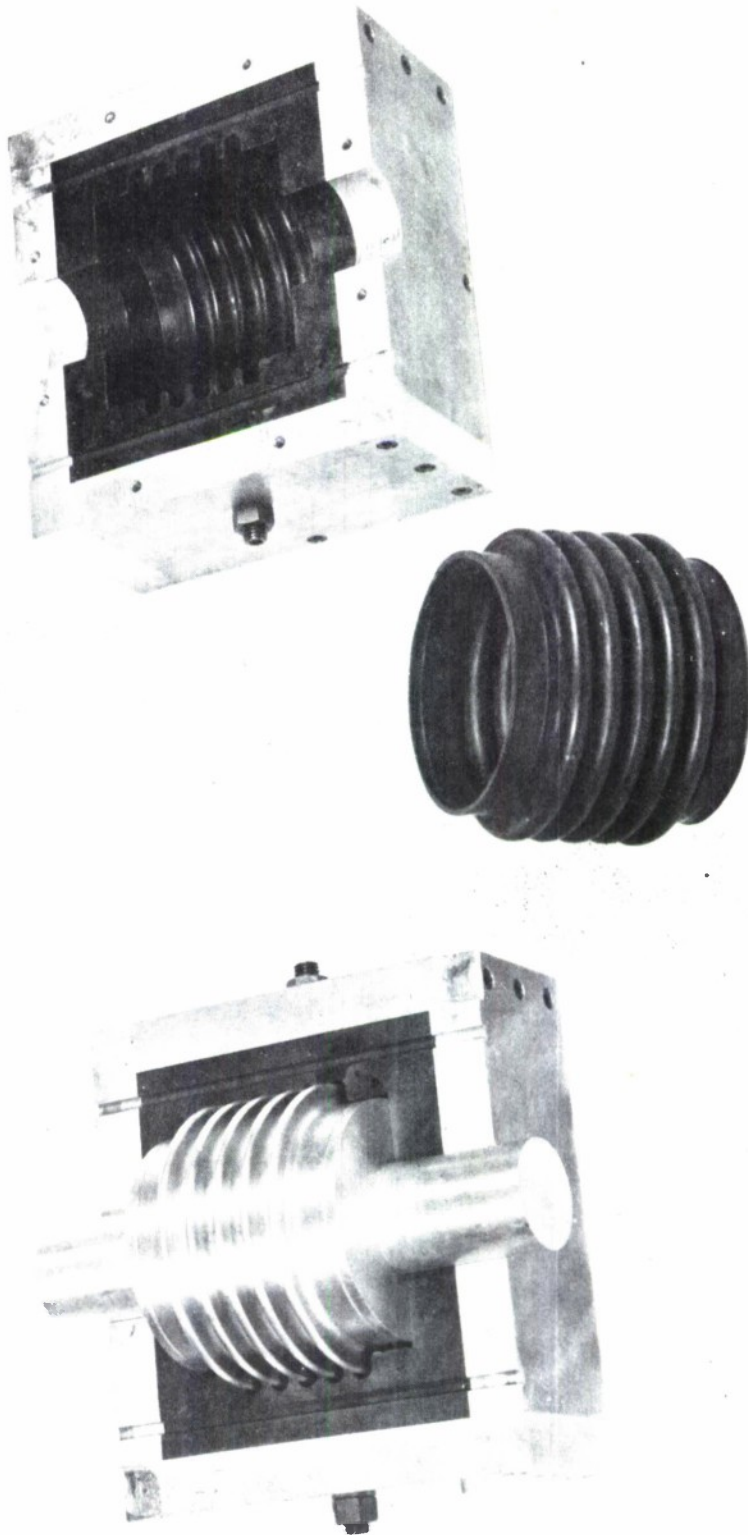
U. S. Gypsum Company S-408 Hy-Temp Surface Coat-Casting Resin epoxy mold with aluminum die base, mandrel and compression molded rubber component for the M47 Tank Hose Collar, PN C7997755.
